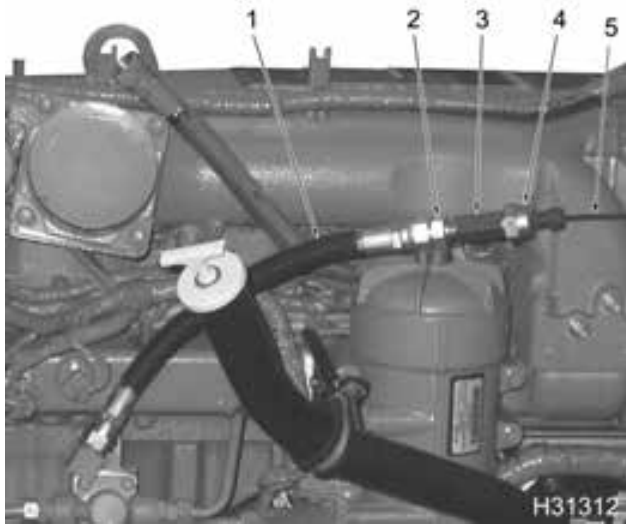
High-pressure oil hose, ICP Test Kit, sensor, and Pressure Sensor Breakout Harness
